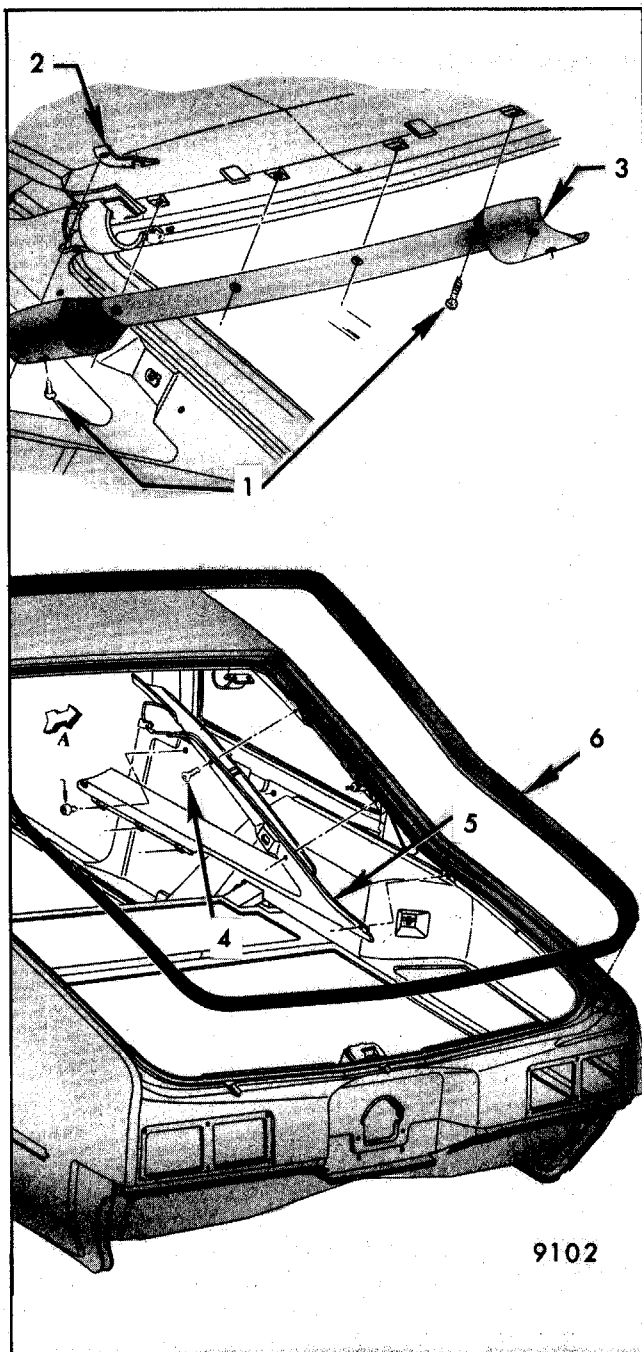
"X-17" Weatherstrip and Trim Removal
